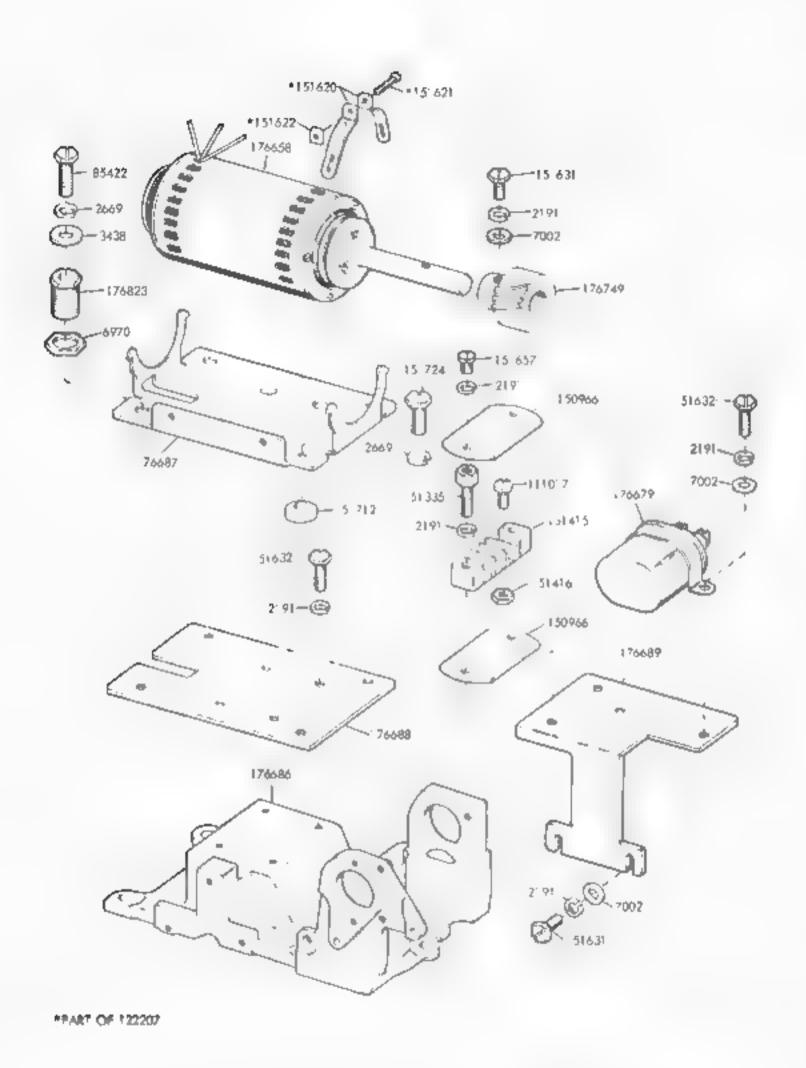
FRAME AND MOTOR MOUNTING PARTS (NON-TYPING PERFORATOR)
